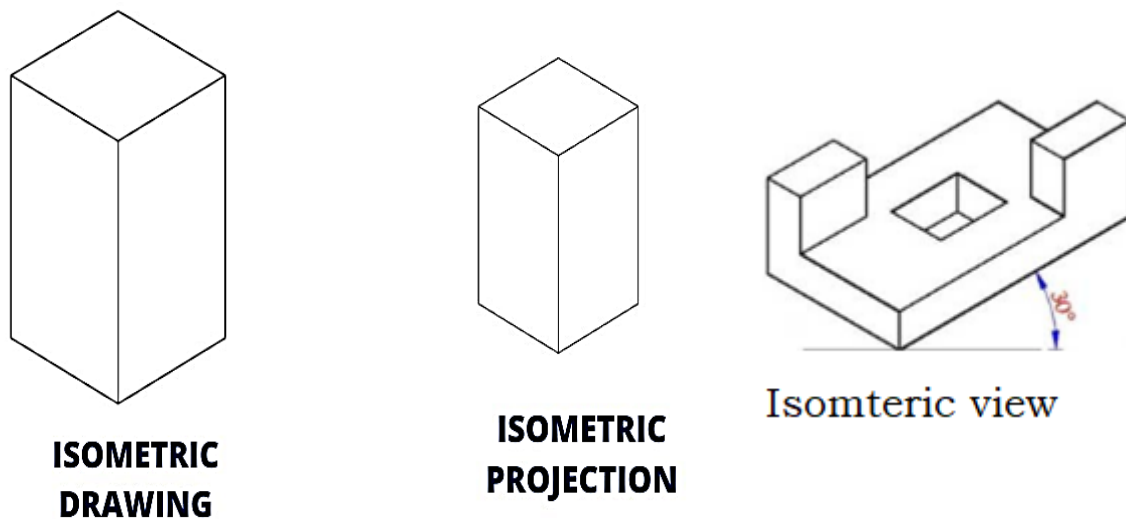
Isometric Drawing, Isometric Projection and Isometric View
